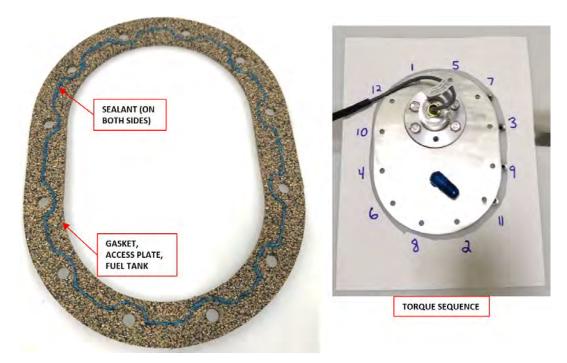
FUEL TANK ACCESS PLATE GASKET AND TORQUE SEQUENCE
